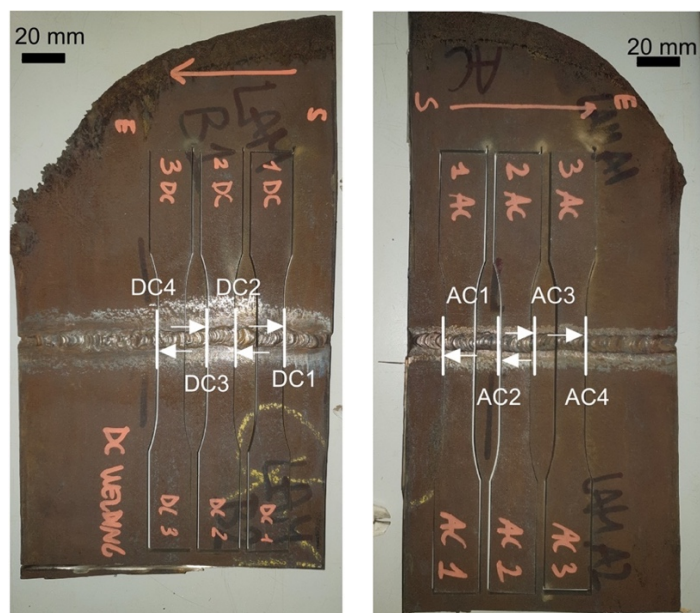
Sheets obtained after the double-V butt welding operation, showing the cross-sections analyzed
